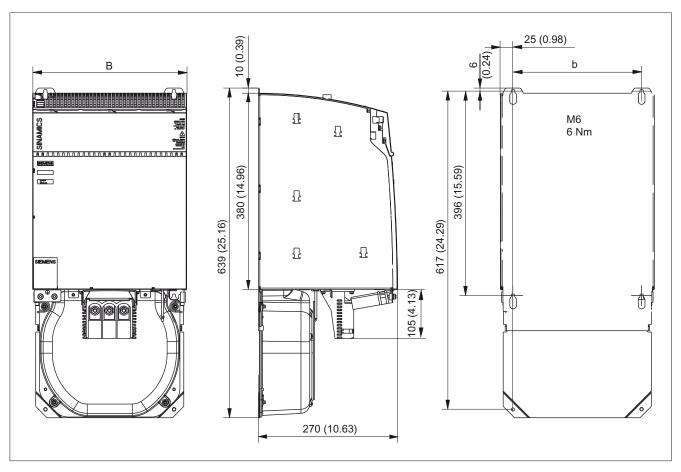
Dimension drawing of Motor Module Booksize with internal air cooling 132 A and 200 A, all dimensions in mm and (inches)
